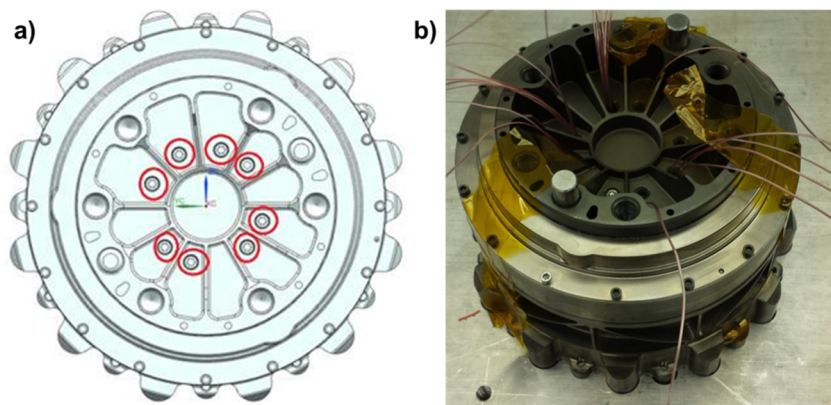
Vent holes used for TC Access. a) schematic showing vent holes, b) instrumented actuator with TC wires routed through the vent holes. The TC wires do not excessively block vent holes.
